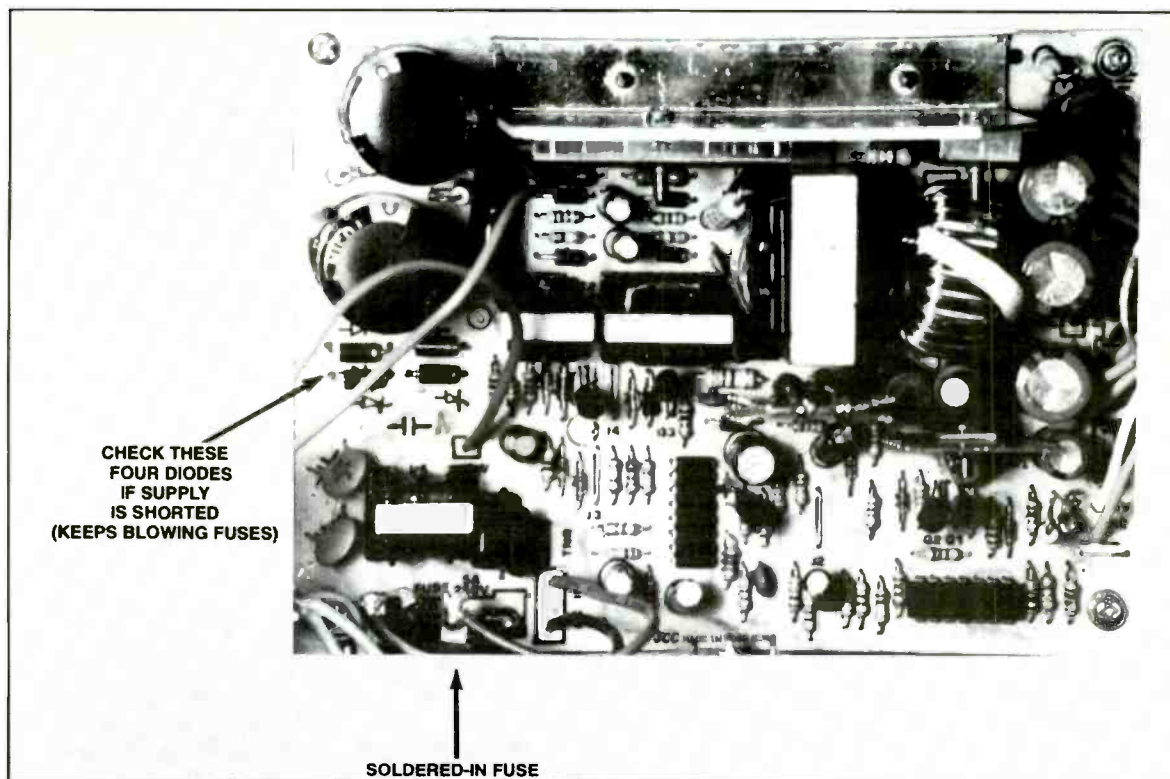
The power supply has a soldered-in fuse that will require a soldering iron for replacement. If the power supply keeps blowing fuses, check the condition of the four diodes.
